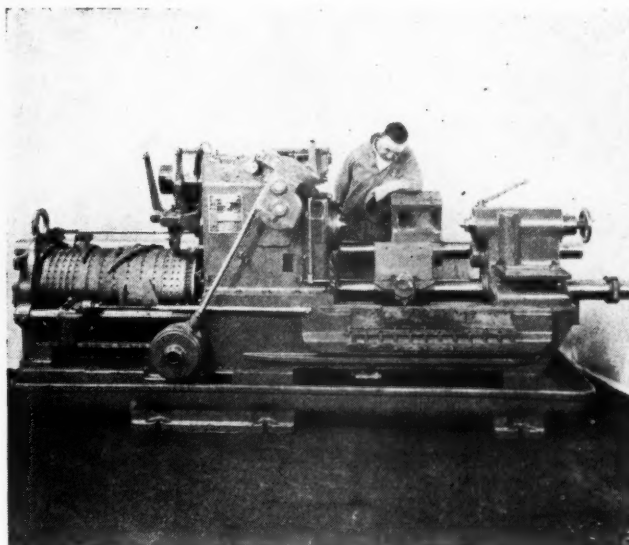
Fay automatic lathe which will take work 24 in. between the centers
